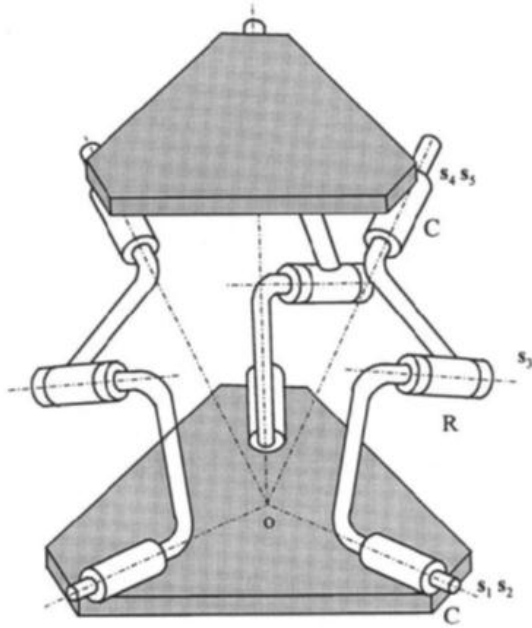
A 3-CRC rotational parallel mechanism [12]
